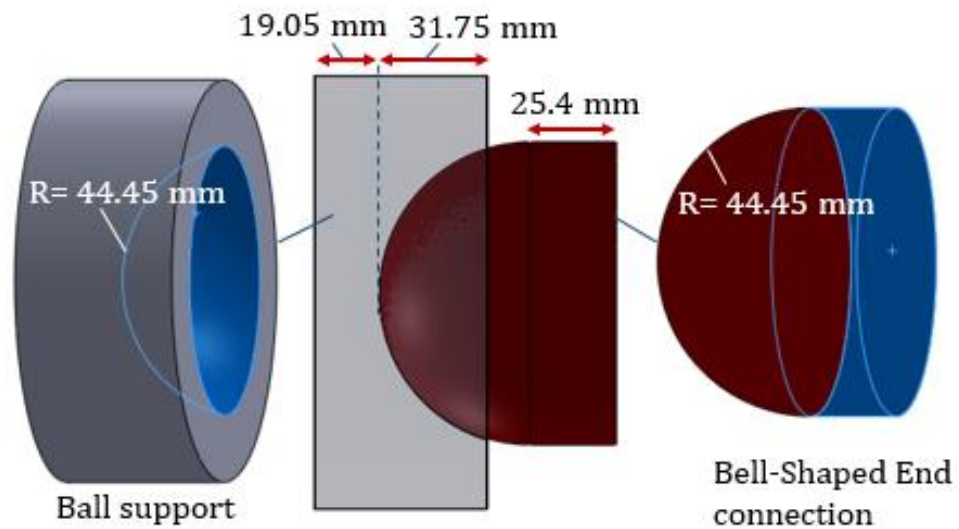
Ball Support (Left), Assembly (Middle), and Bell-Shaped End Connection (Right)
